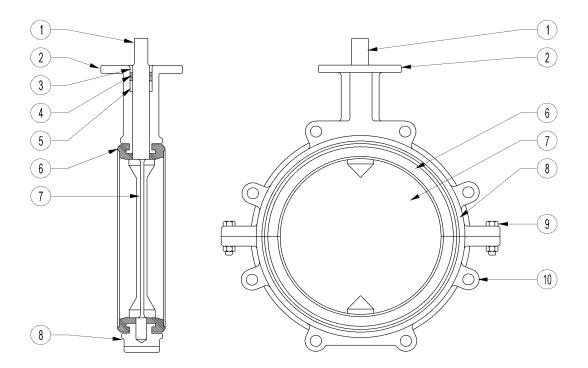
Lugged or single flanged butterfly valve seal on body type.
